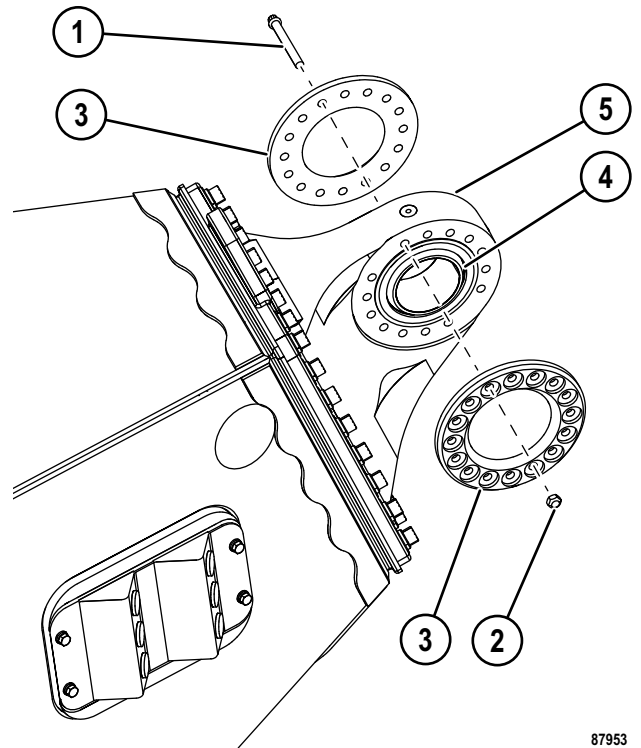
PIVOT EYE BEARING REMOVAL & INSTALLATION
